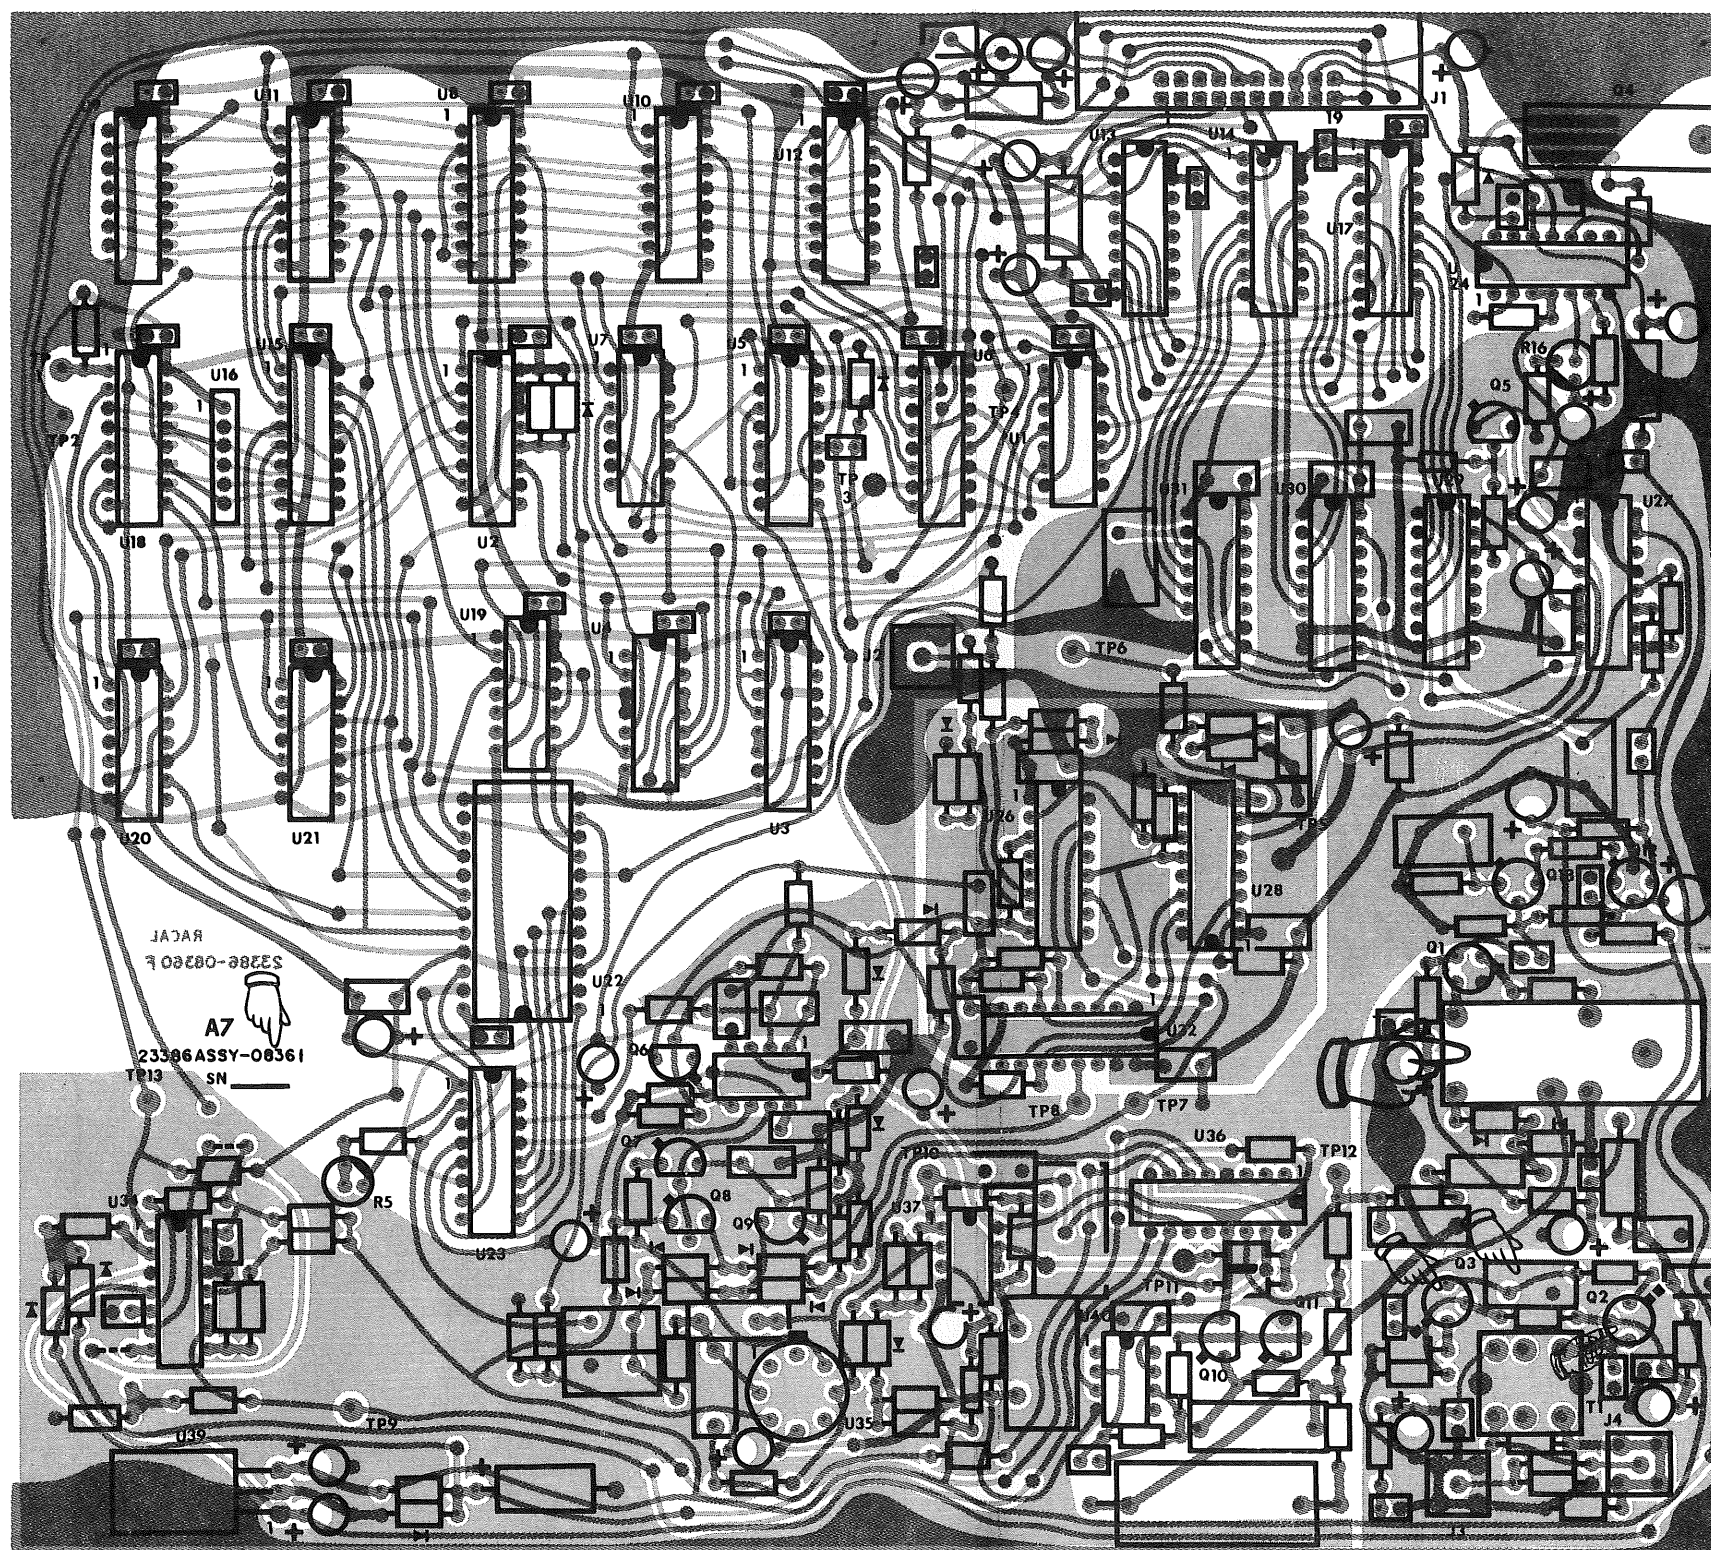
B. First LO Synthesizer A7 Printed Circuit
